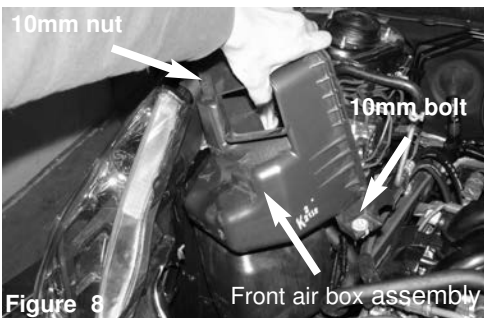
Use a 10mm socket and ratchet and remove the 10mm nut and bolt from the front air box assembly indicated by the arrows in the photo. Lift the front air box assembly and remove from engine bay.
